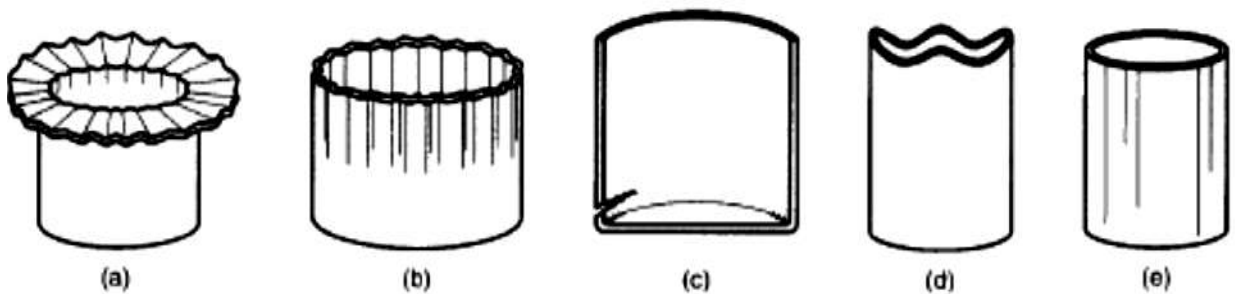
Defects in deep drawing cylindrical cups. [27]
